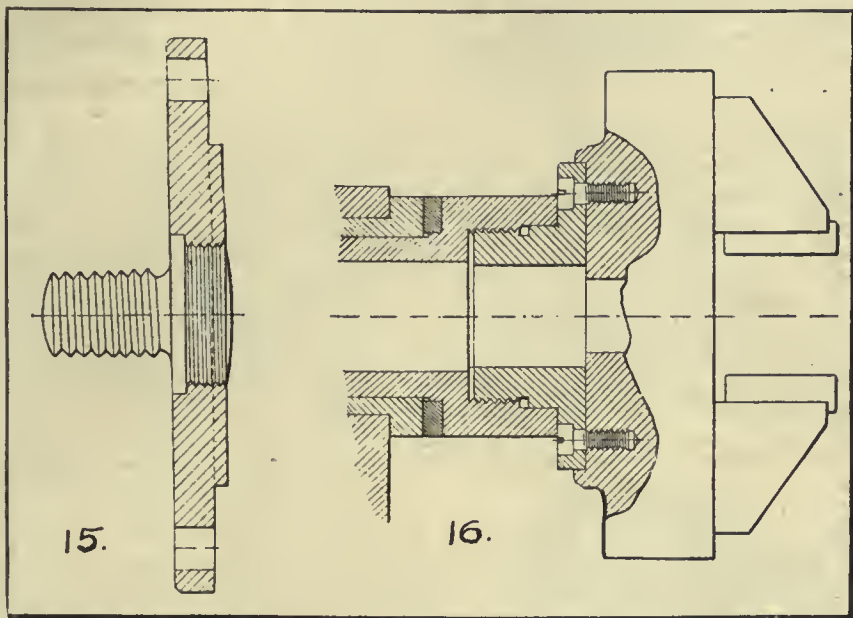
FORGED ADAPTER PLATE WITH SCREWED TAIL.
